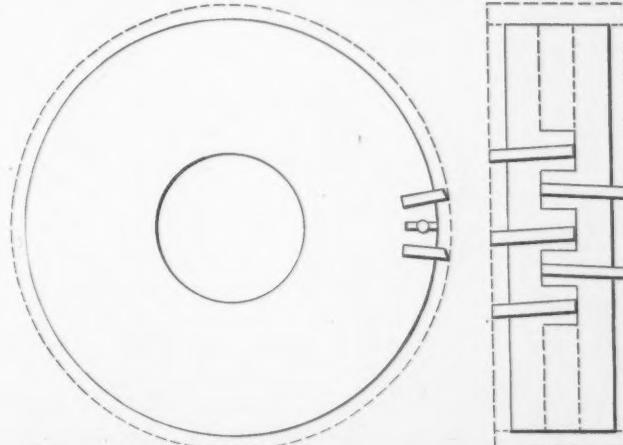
INSERTED TOOTH CUTTER WHICH MAY BE ADJUSTED FOR WIDTH.
